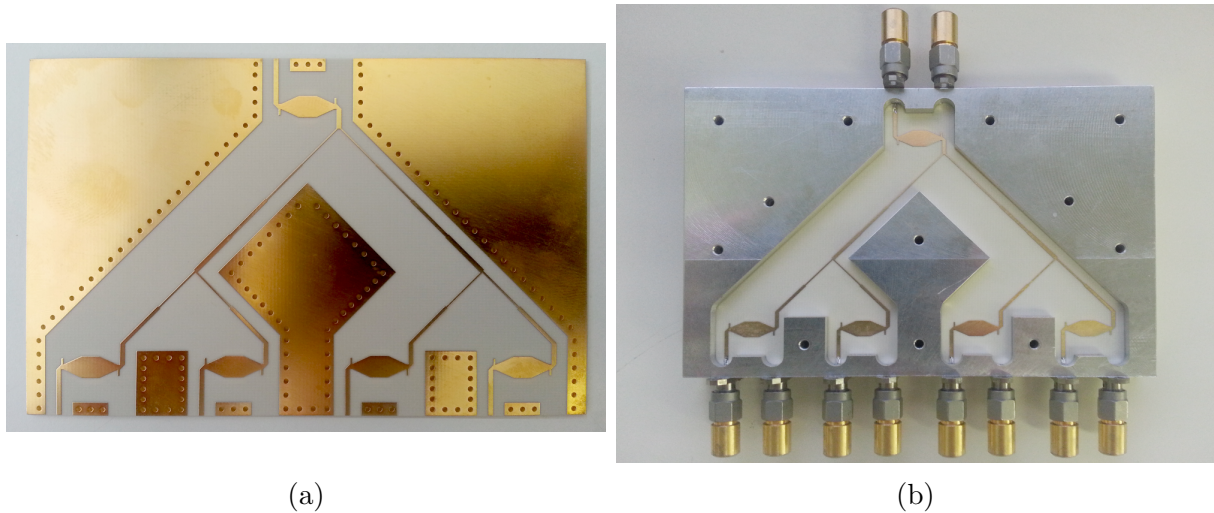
(a) A photo of the manufactured PCB containing the combiners and couplers, and (b) a photo of the PCB sandwiched between the two machined aluminium plates that form the walls that are shorted to ground through vias.
